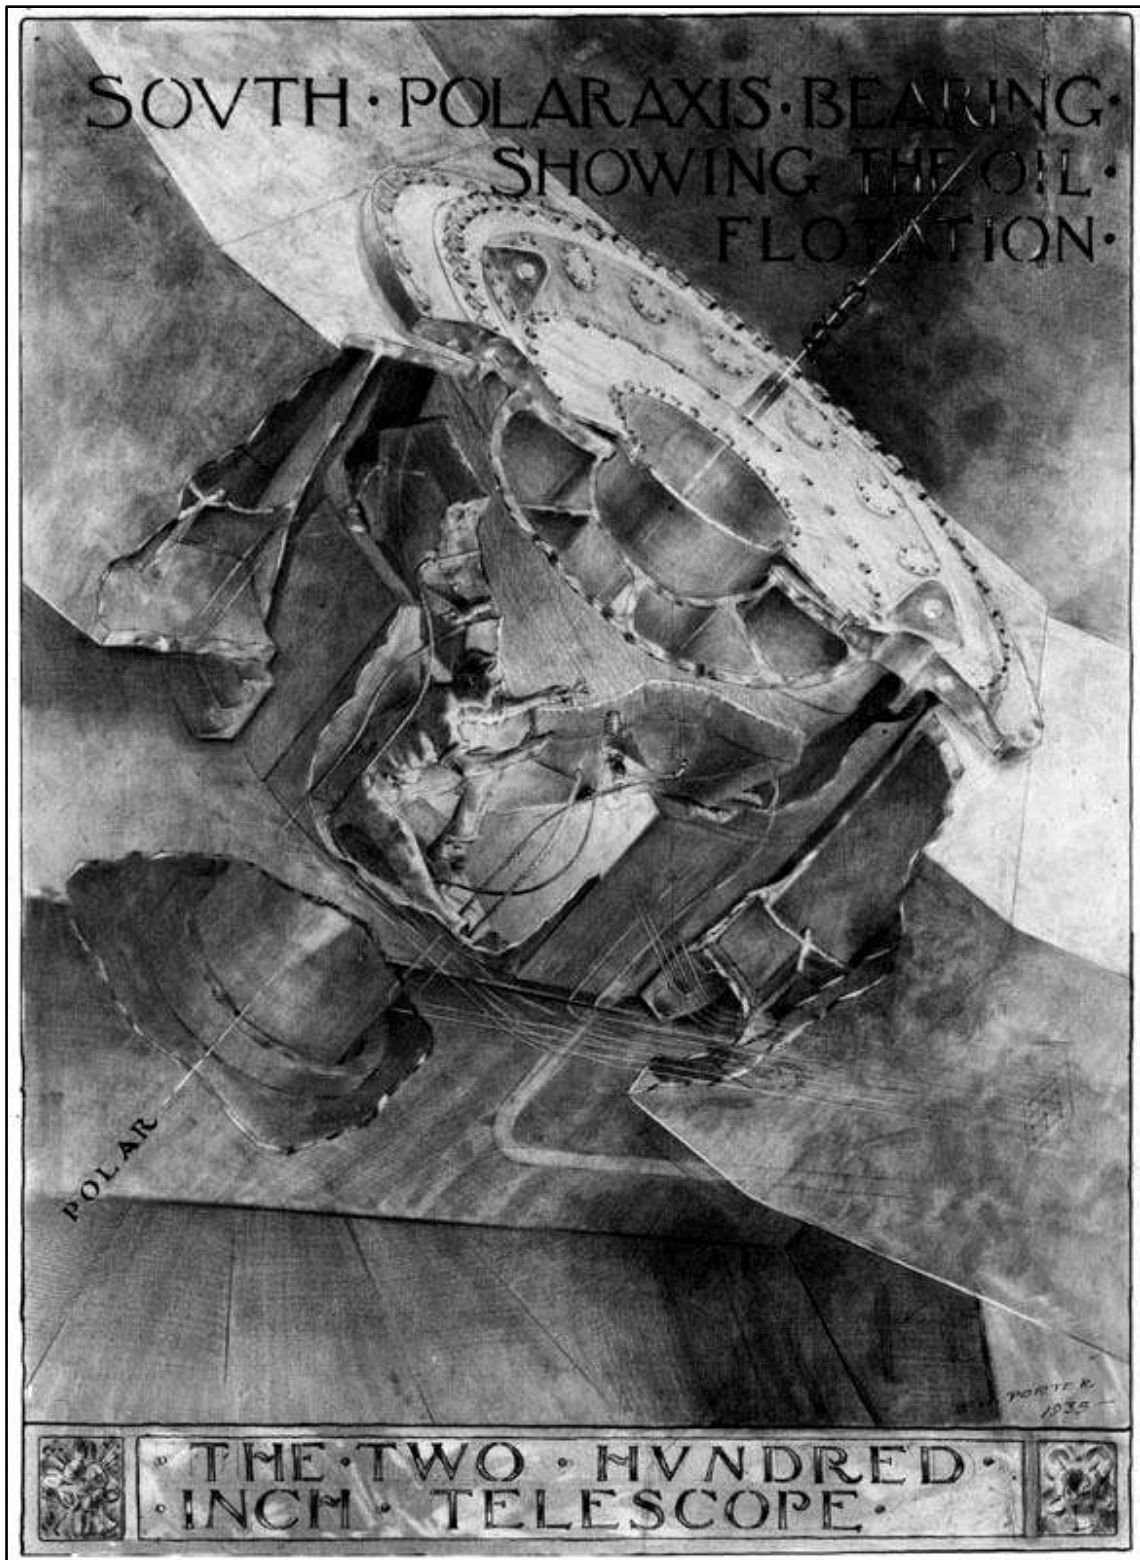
South polar-axis bearing. A steel hemisphere, three metal supporting pads, and a film of oil comprise the essential parts of the bearing at the south end of the telescope yolk.
